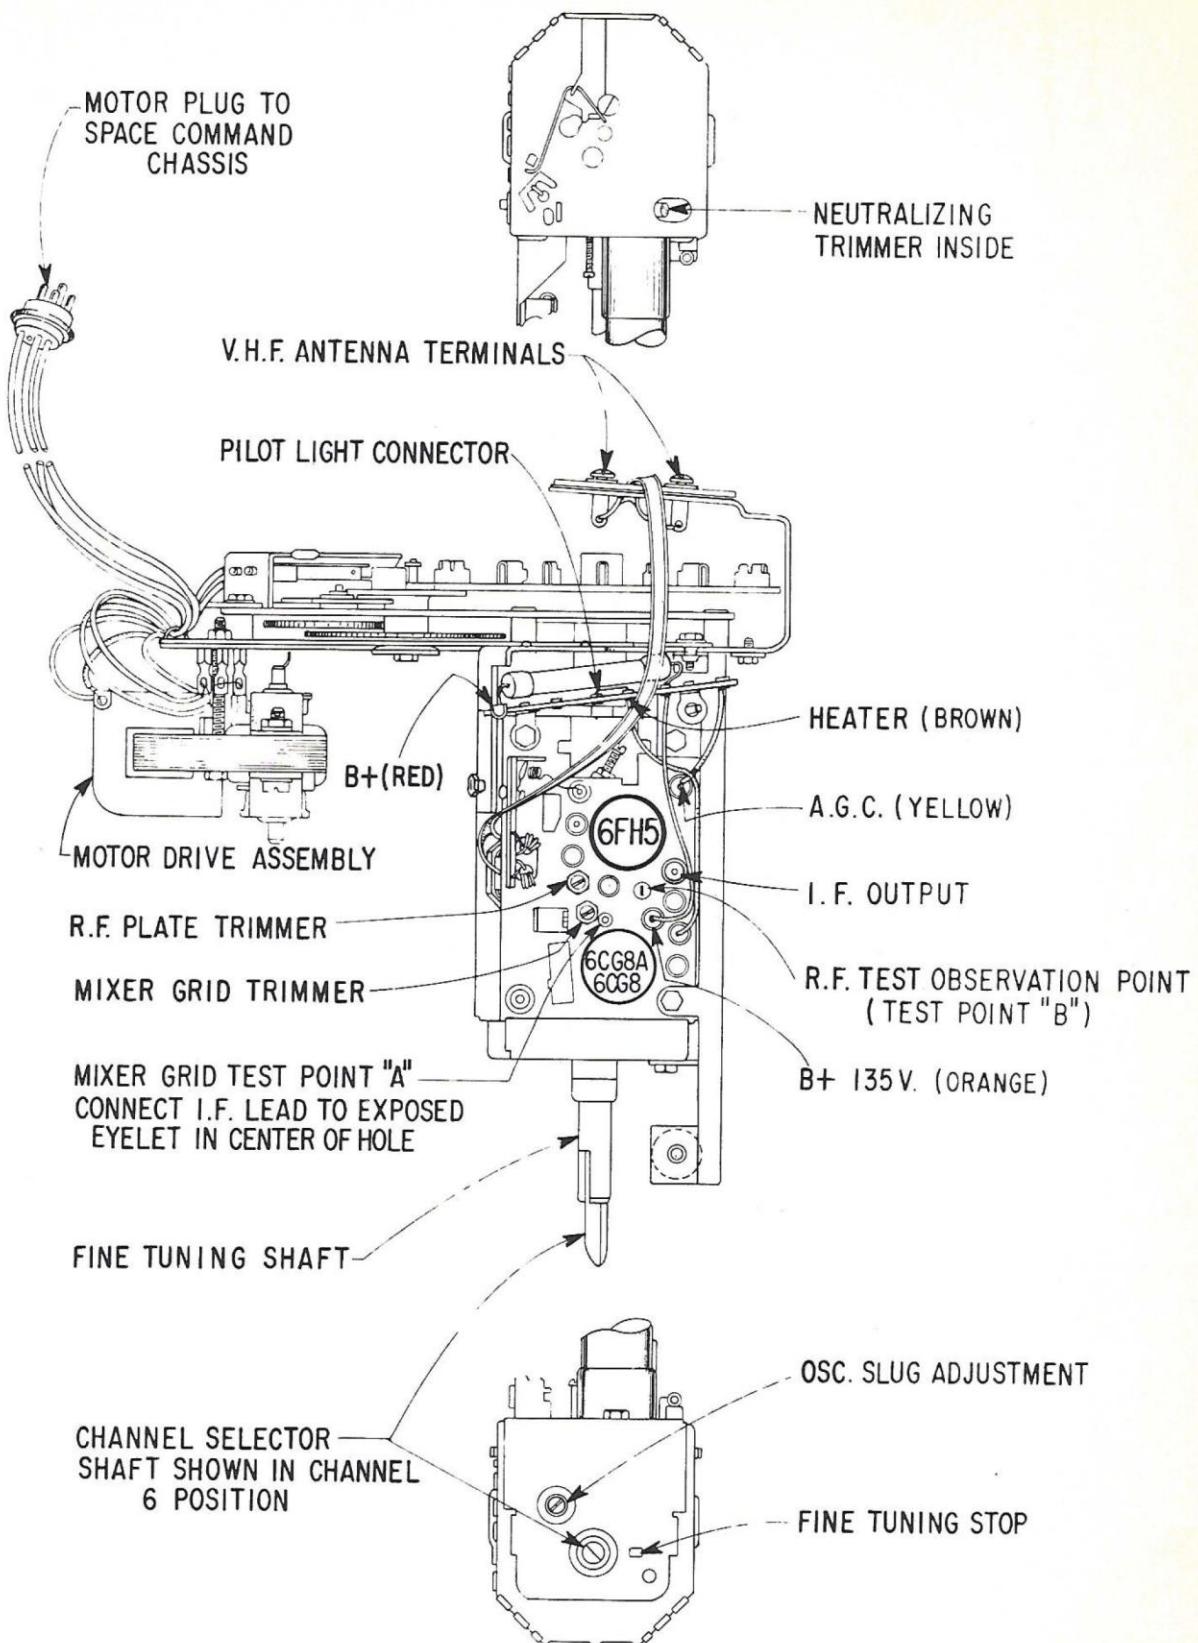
Tube and Trimmer Layout 175-148 Target Tuner
